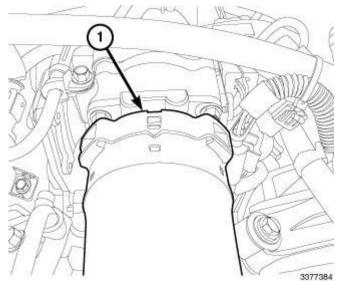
Charge Air Cooler Hose Courtesy of CHRYSLER GROUP, LLC
